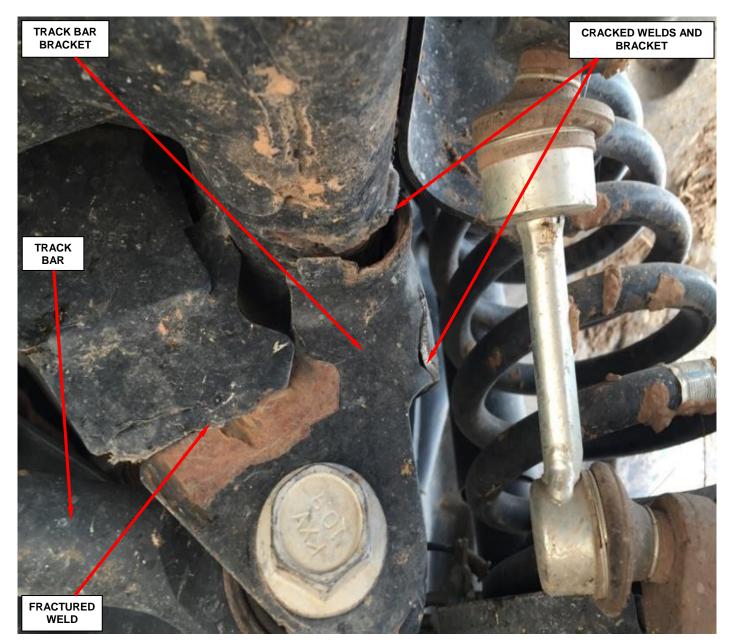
Example of a Fractured Weld at Track Bar Bracket
